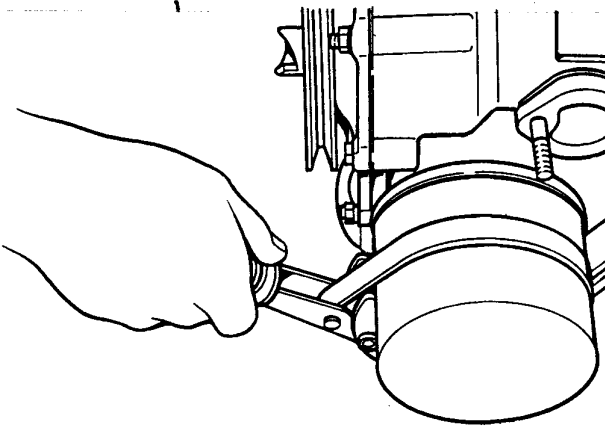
Removing Oil Filter with Remover Tool A.60312
